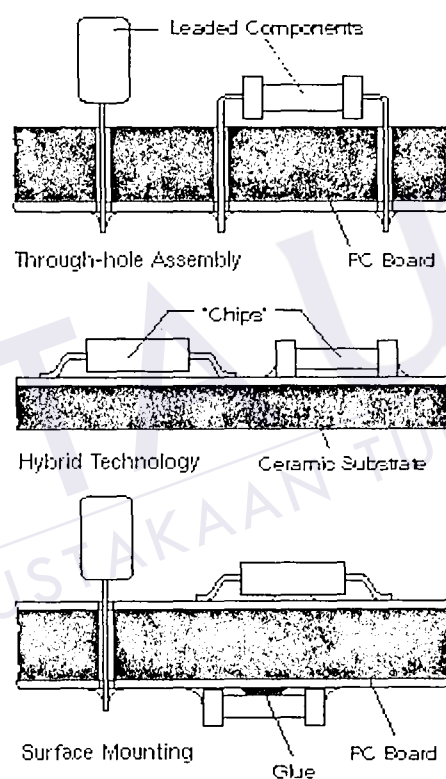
Through-hole Assembly -- Hybrid Technology -- Surface Mounting
